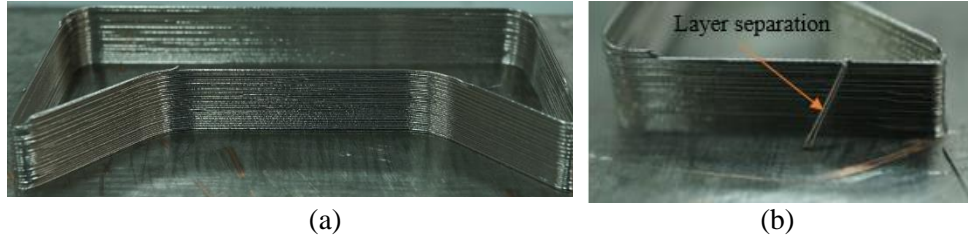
Layer separation on the printed structure; a) front view and b) side view
